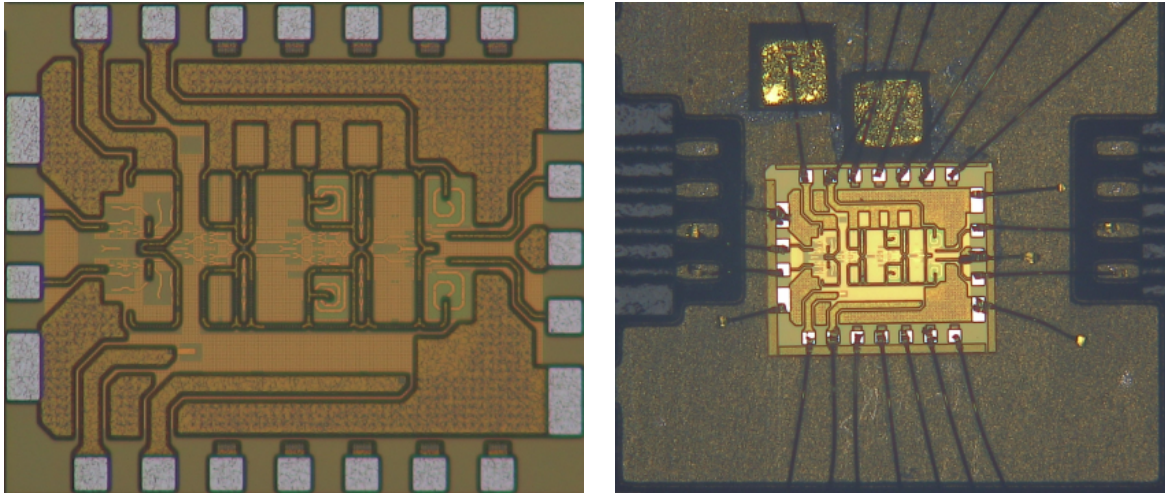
Microphotograph of the fabricated chip (left) and PCB assembly for testing at 60 Gbps (right)
